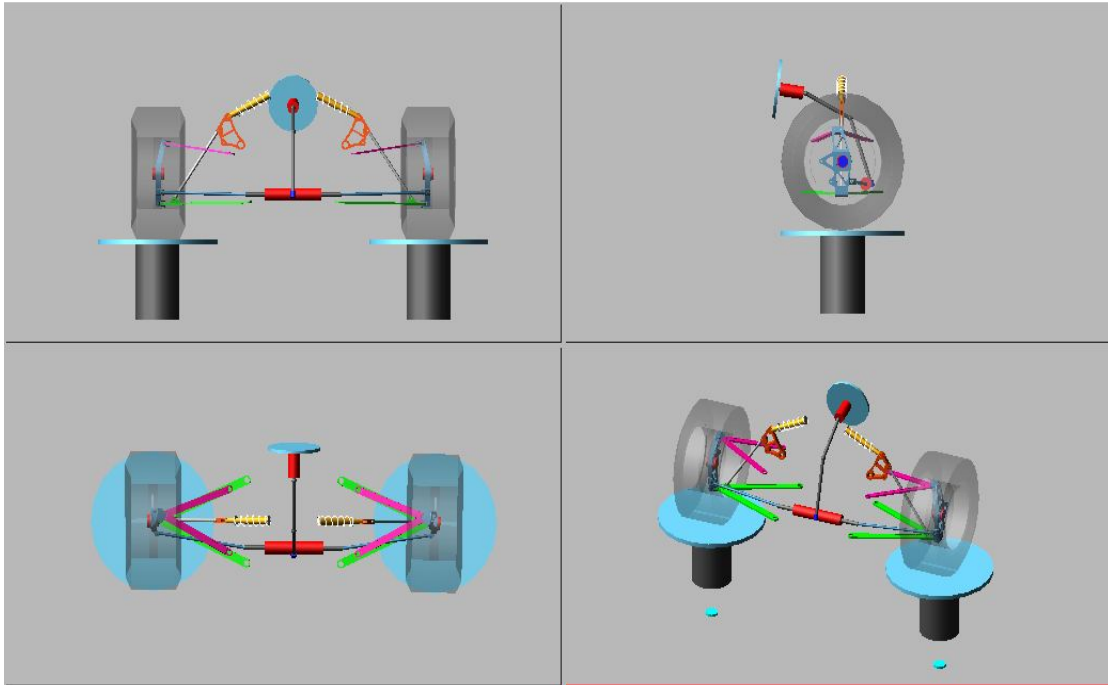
TU FSAE Front Suspension Assembly (MBD Model Views)
